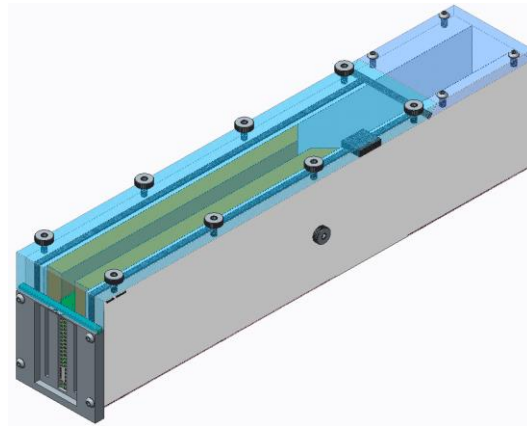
Tester isometric view in SINGLE-SLOT Add-in Card AFI testing configuration
